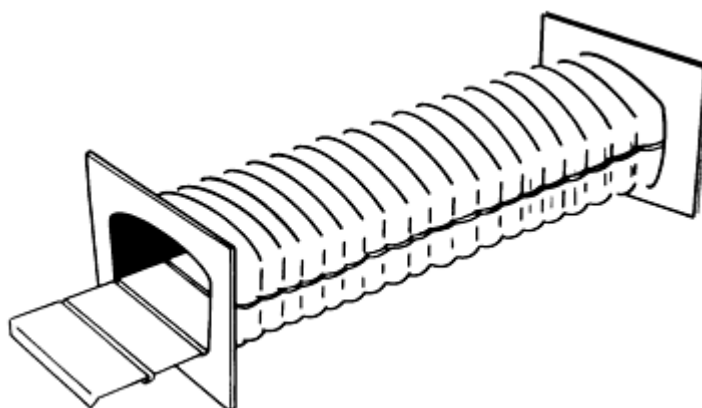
Typical fabricated D-shaped muffle with internal hearth
